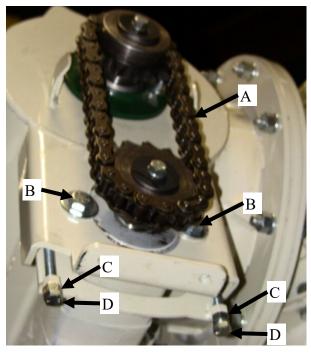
Discharge Auger Drive Chain (Shield Removed for Clarity).
